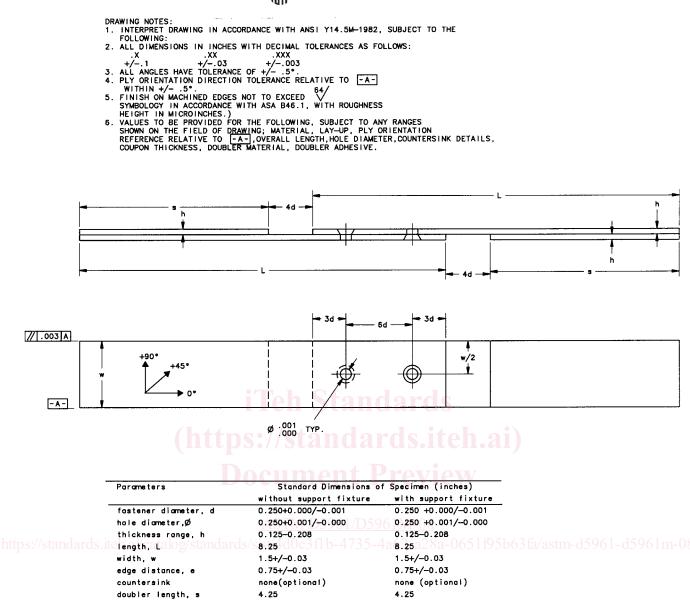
Single-Shear, Two-Piece Double Fastener Test Specimen Drawing (Inch-Pound)
